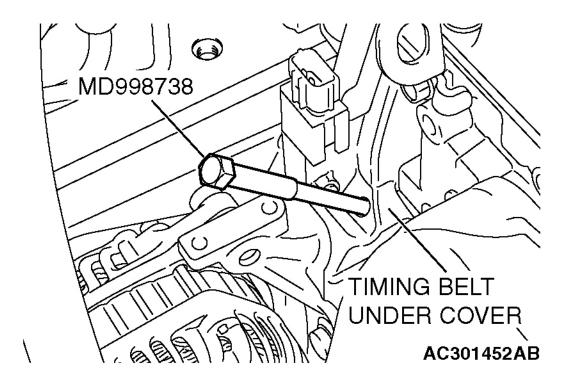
Identifying Timing Belt Under Cover & Special Tool MD998738
